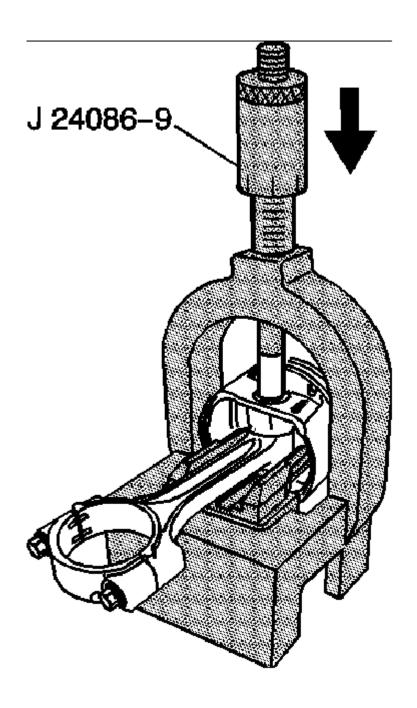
View Of J 24086-9 Courtesy of GENERAL MOTORS CORP.
